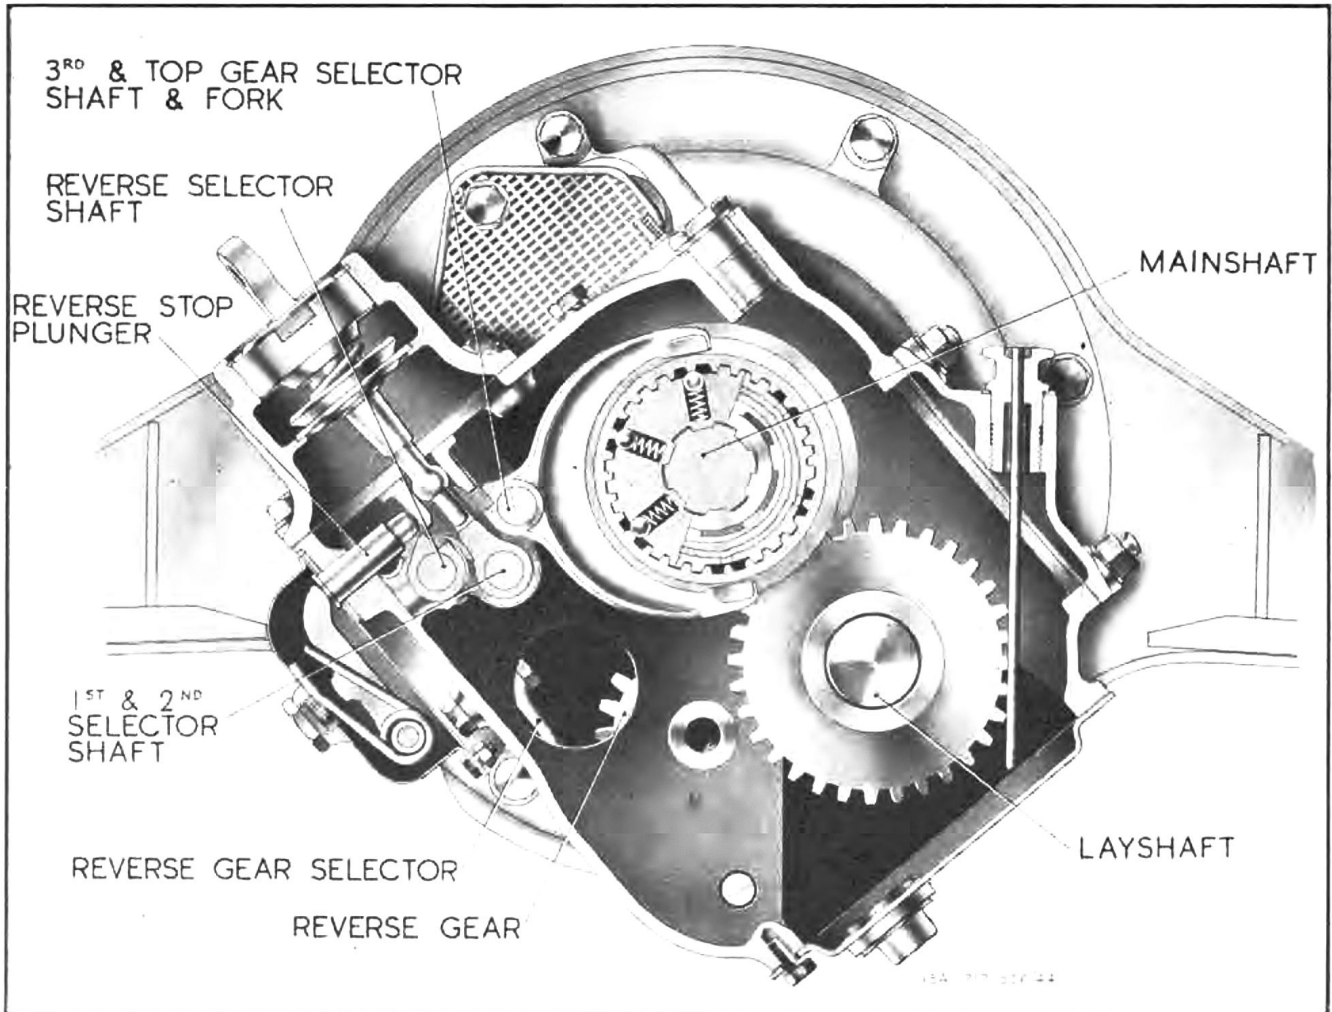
GEARBOX, TRANSVERSE SECTION.
